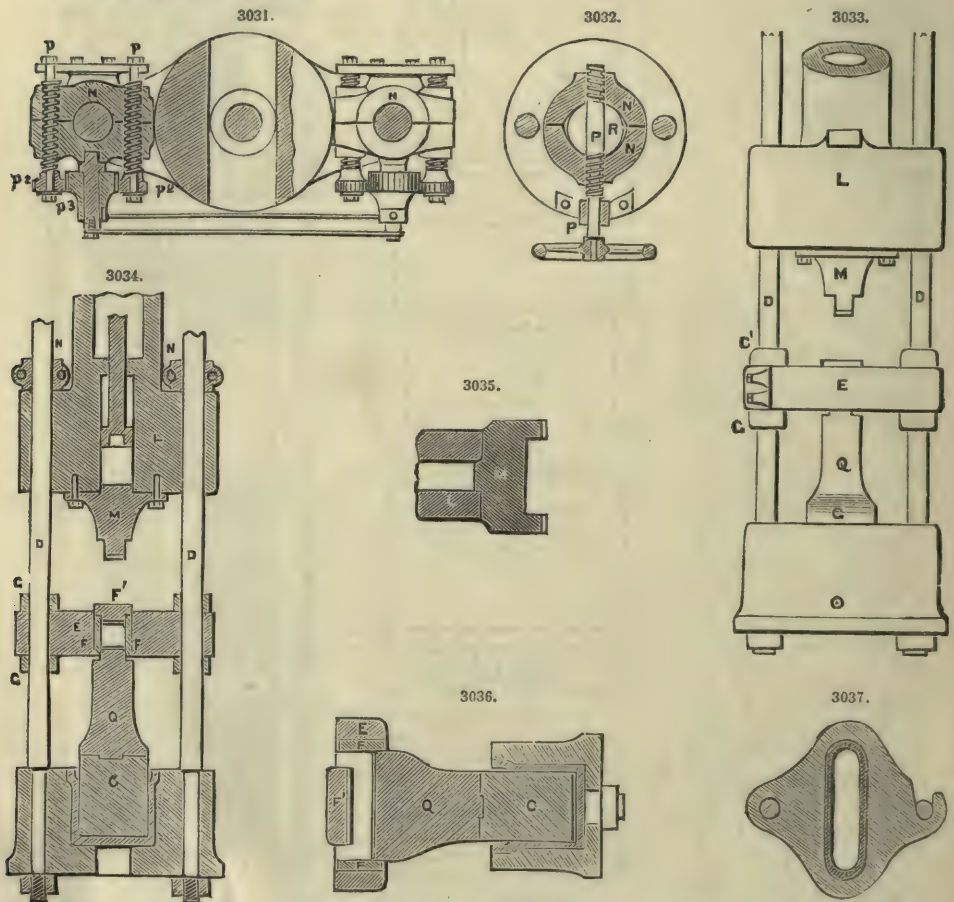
shows an elevation of some of the principal parts of a press similar to that already described; Fig. 3034 a vertical section of it; and Figs. 3035 to 3037 show vertical sections of the parts taken at right angles to the section shown at Fig. 3034. The mould here shown is suitable for casting an ingot under great pressure, there being no central core, as in the arrangement just described. The mould F, which is of steel, is suitable for chill-cast ingots of the form shown. F¹ F² are the movable top and bottom parts of the mould; the part F¹ is made with inclined sides, and is received into the block or casting E, which is retained in any desired position on the screws D, by the screw-nuts G G¹; the part F² of the mould is carried by the ram Q, actuated by the plunger C in the hydraulic cylinder. The part F¹ of the mould is not made so long as the parts F² in order to leave spaces at the end open, through which the melted metal is poured, and the mould on this side is made complete by the two parts F³ F³. The parts F¹, F², and F³ are coated with baked sand or loam, and such may be the case when required with the sides of
